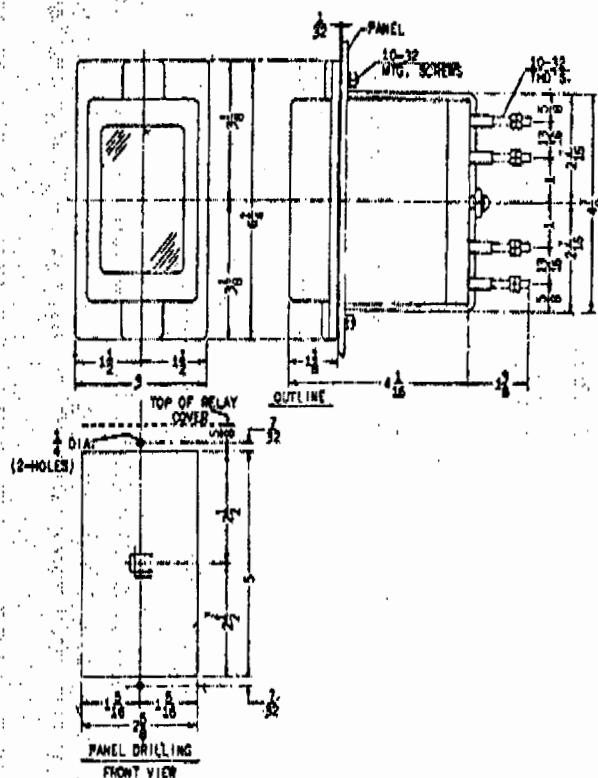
(0148A3978-2) Outline And Panel Drilling Dimensions For The Semi-Flush Mounted NGV17A Relay
